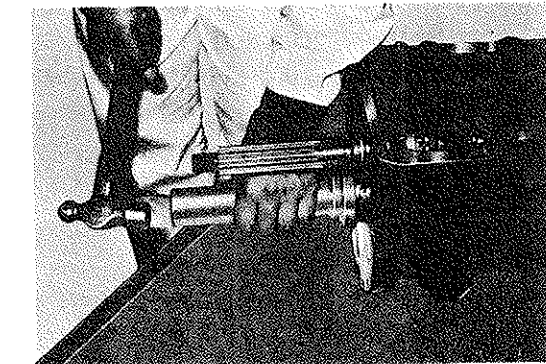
Press-Fitting of Counter Gear Rear Bearing
